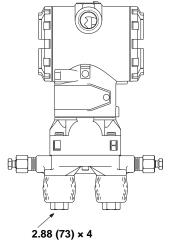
Mounting Bolts and Bolt Configurations for Coplanar Flange
